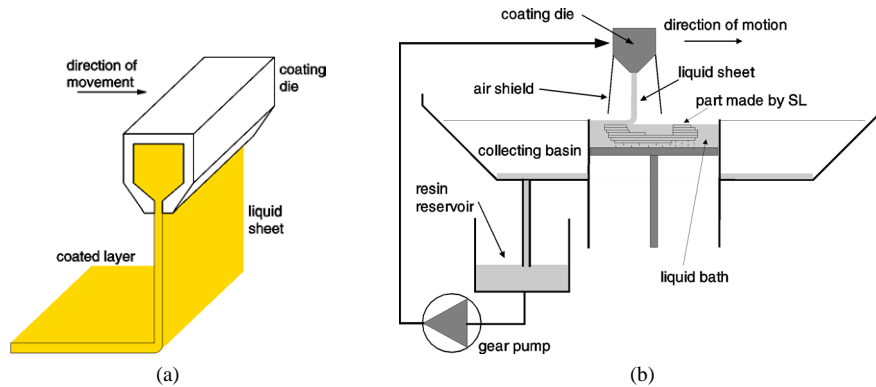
Curtain recoating for stereolithography: coating of a new liquid layer. (a) Coating die extruding a liquid sheet, and coating of a liquid layer. (b) Schematic view of the machine and its layer coating process.
